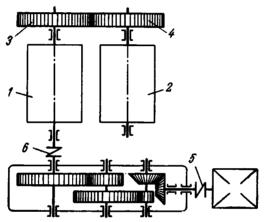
Gearing diagram of the PTY-30 (RTU-30) conveyor drive head
